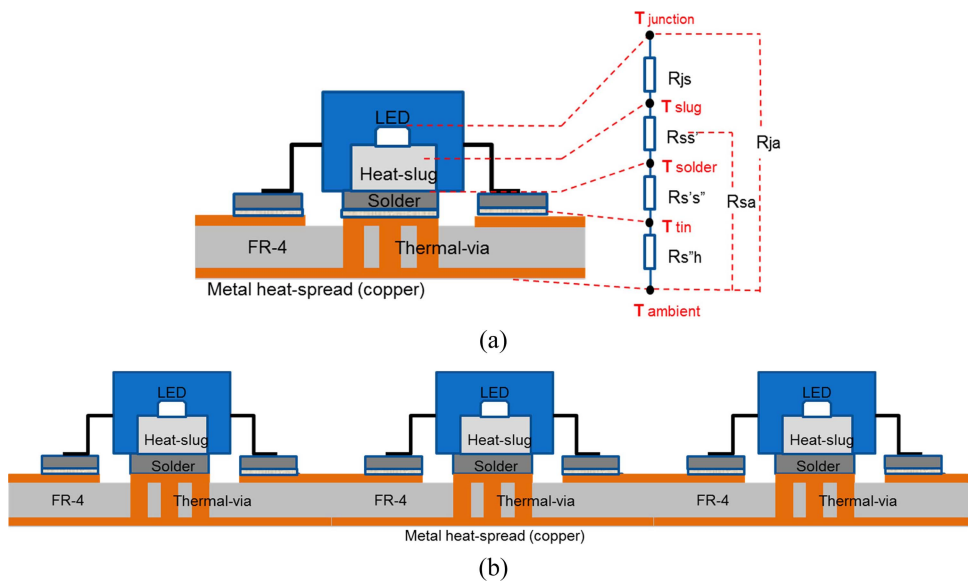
Schematic illustration of LED array module with thermal-via type FR-4 PCB: (a) single chip and (b) multichip mounting module.
